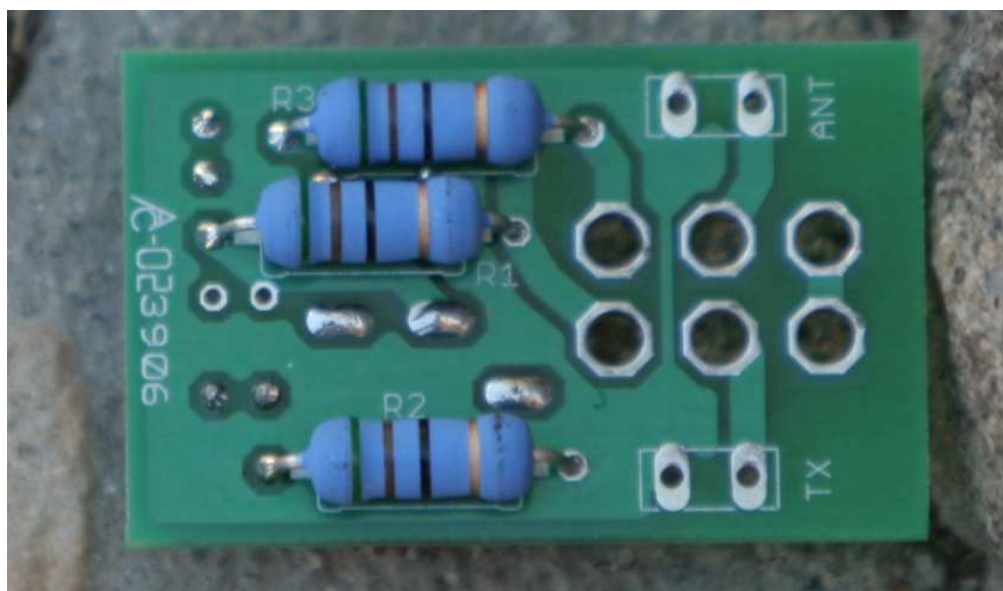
Three 51 ohm power resistors mounted on the bottom side of the PC board
